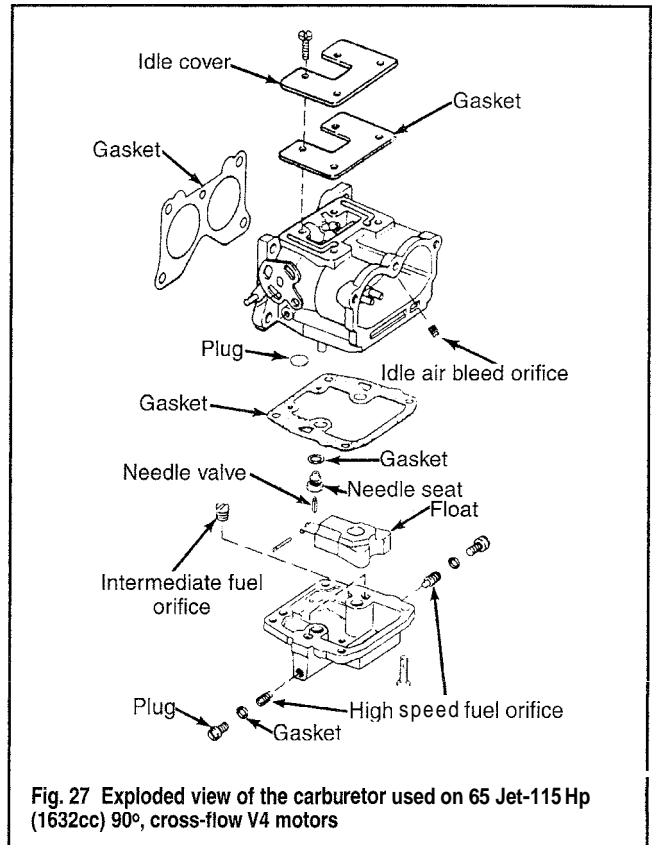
Exploded view of the carburetor used on 65 Jet-115 Hp (1632cc) 90°, cross-flow V4 motors
